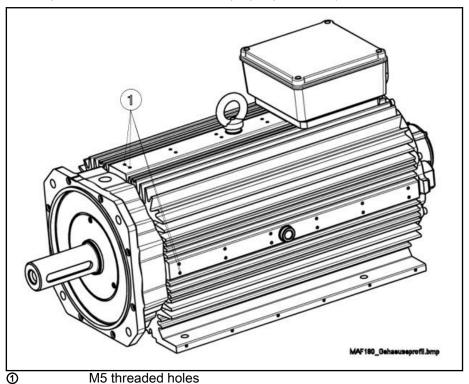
Threaded holes at the motor housing MAF180 / 225
